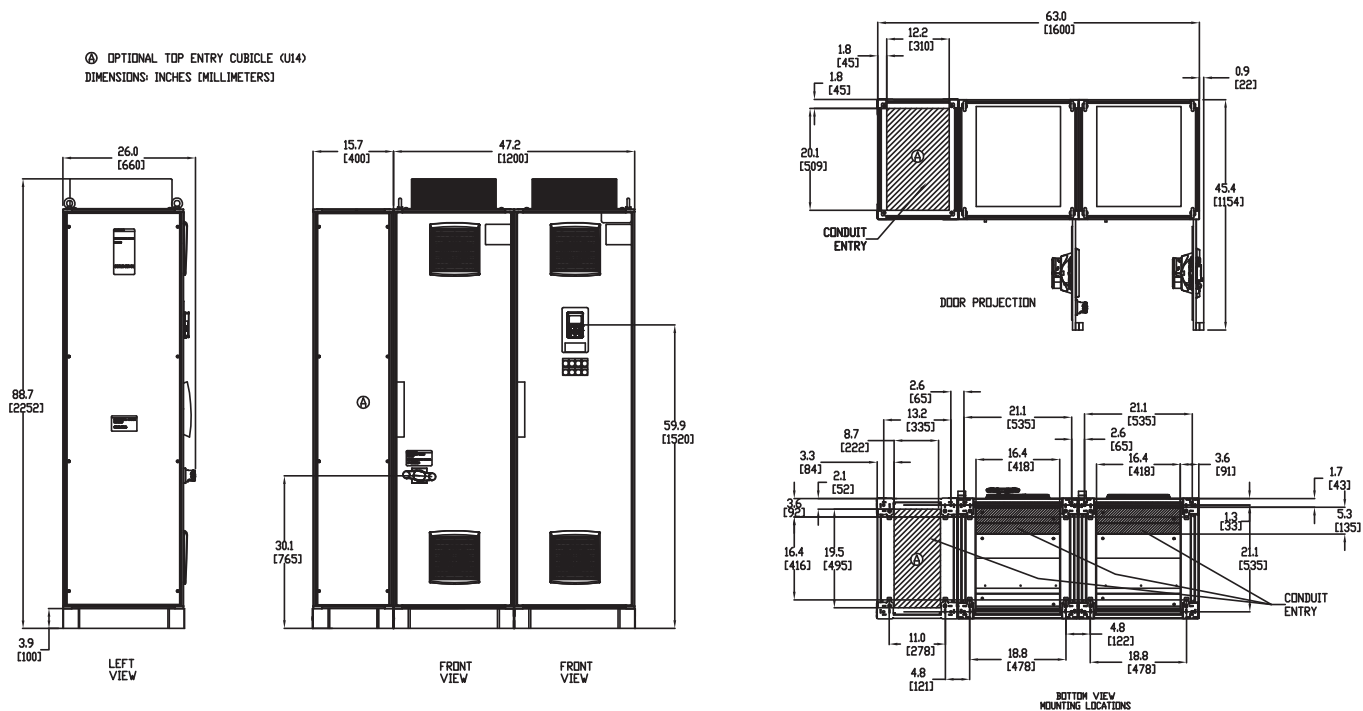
2000 mm Enclosure, Standard Drive without Harmonic Filter, Type 12
